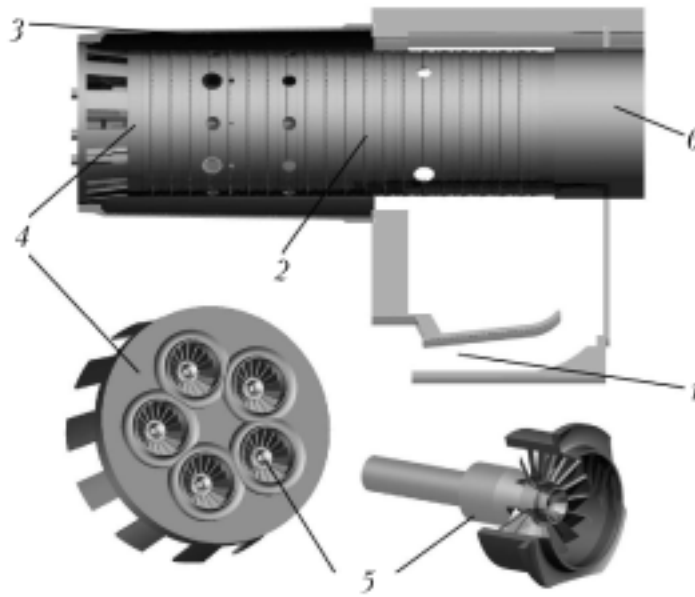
General view of the solid-state model of the GTE-150 combustion chamber: 1) region of the exit from the compressor; 2) flame tube; 3) coupling cylinder; 4) front plate; 5) burner (vane swirler and fuel injector); 6) reducer.
